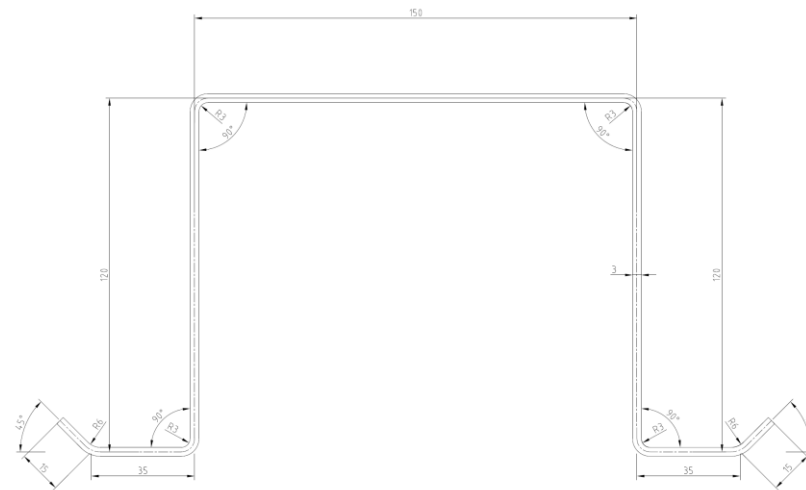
Hat section cross section dimension, H120-RIN3-DEG0
